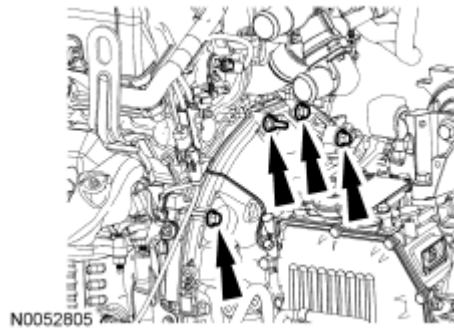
Identifying Upper Transaxle-To-Engine Bolts
